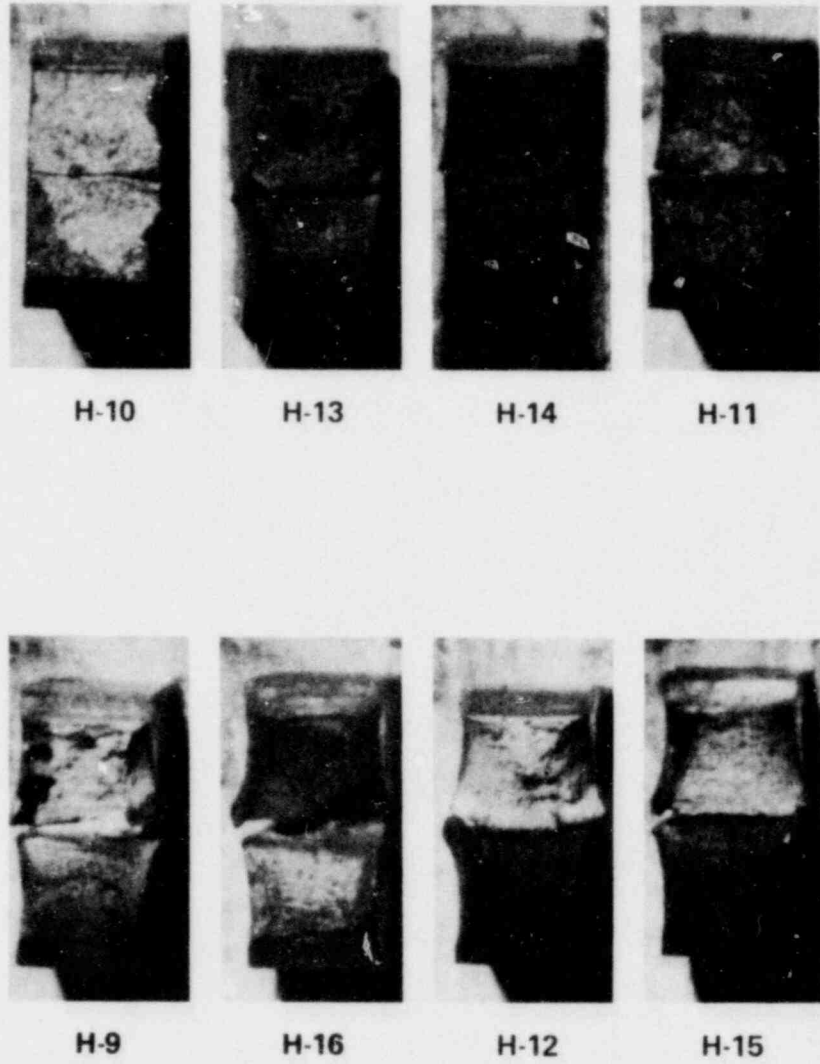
Charpy Impact Specimen Fracture Surfaces for Kewaunee HAZ Material
